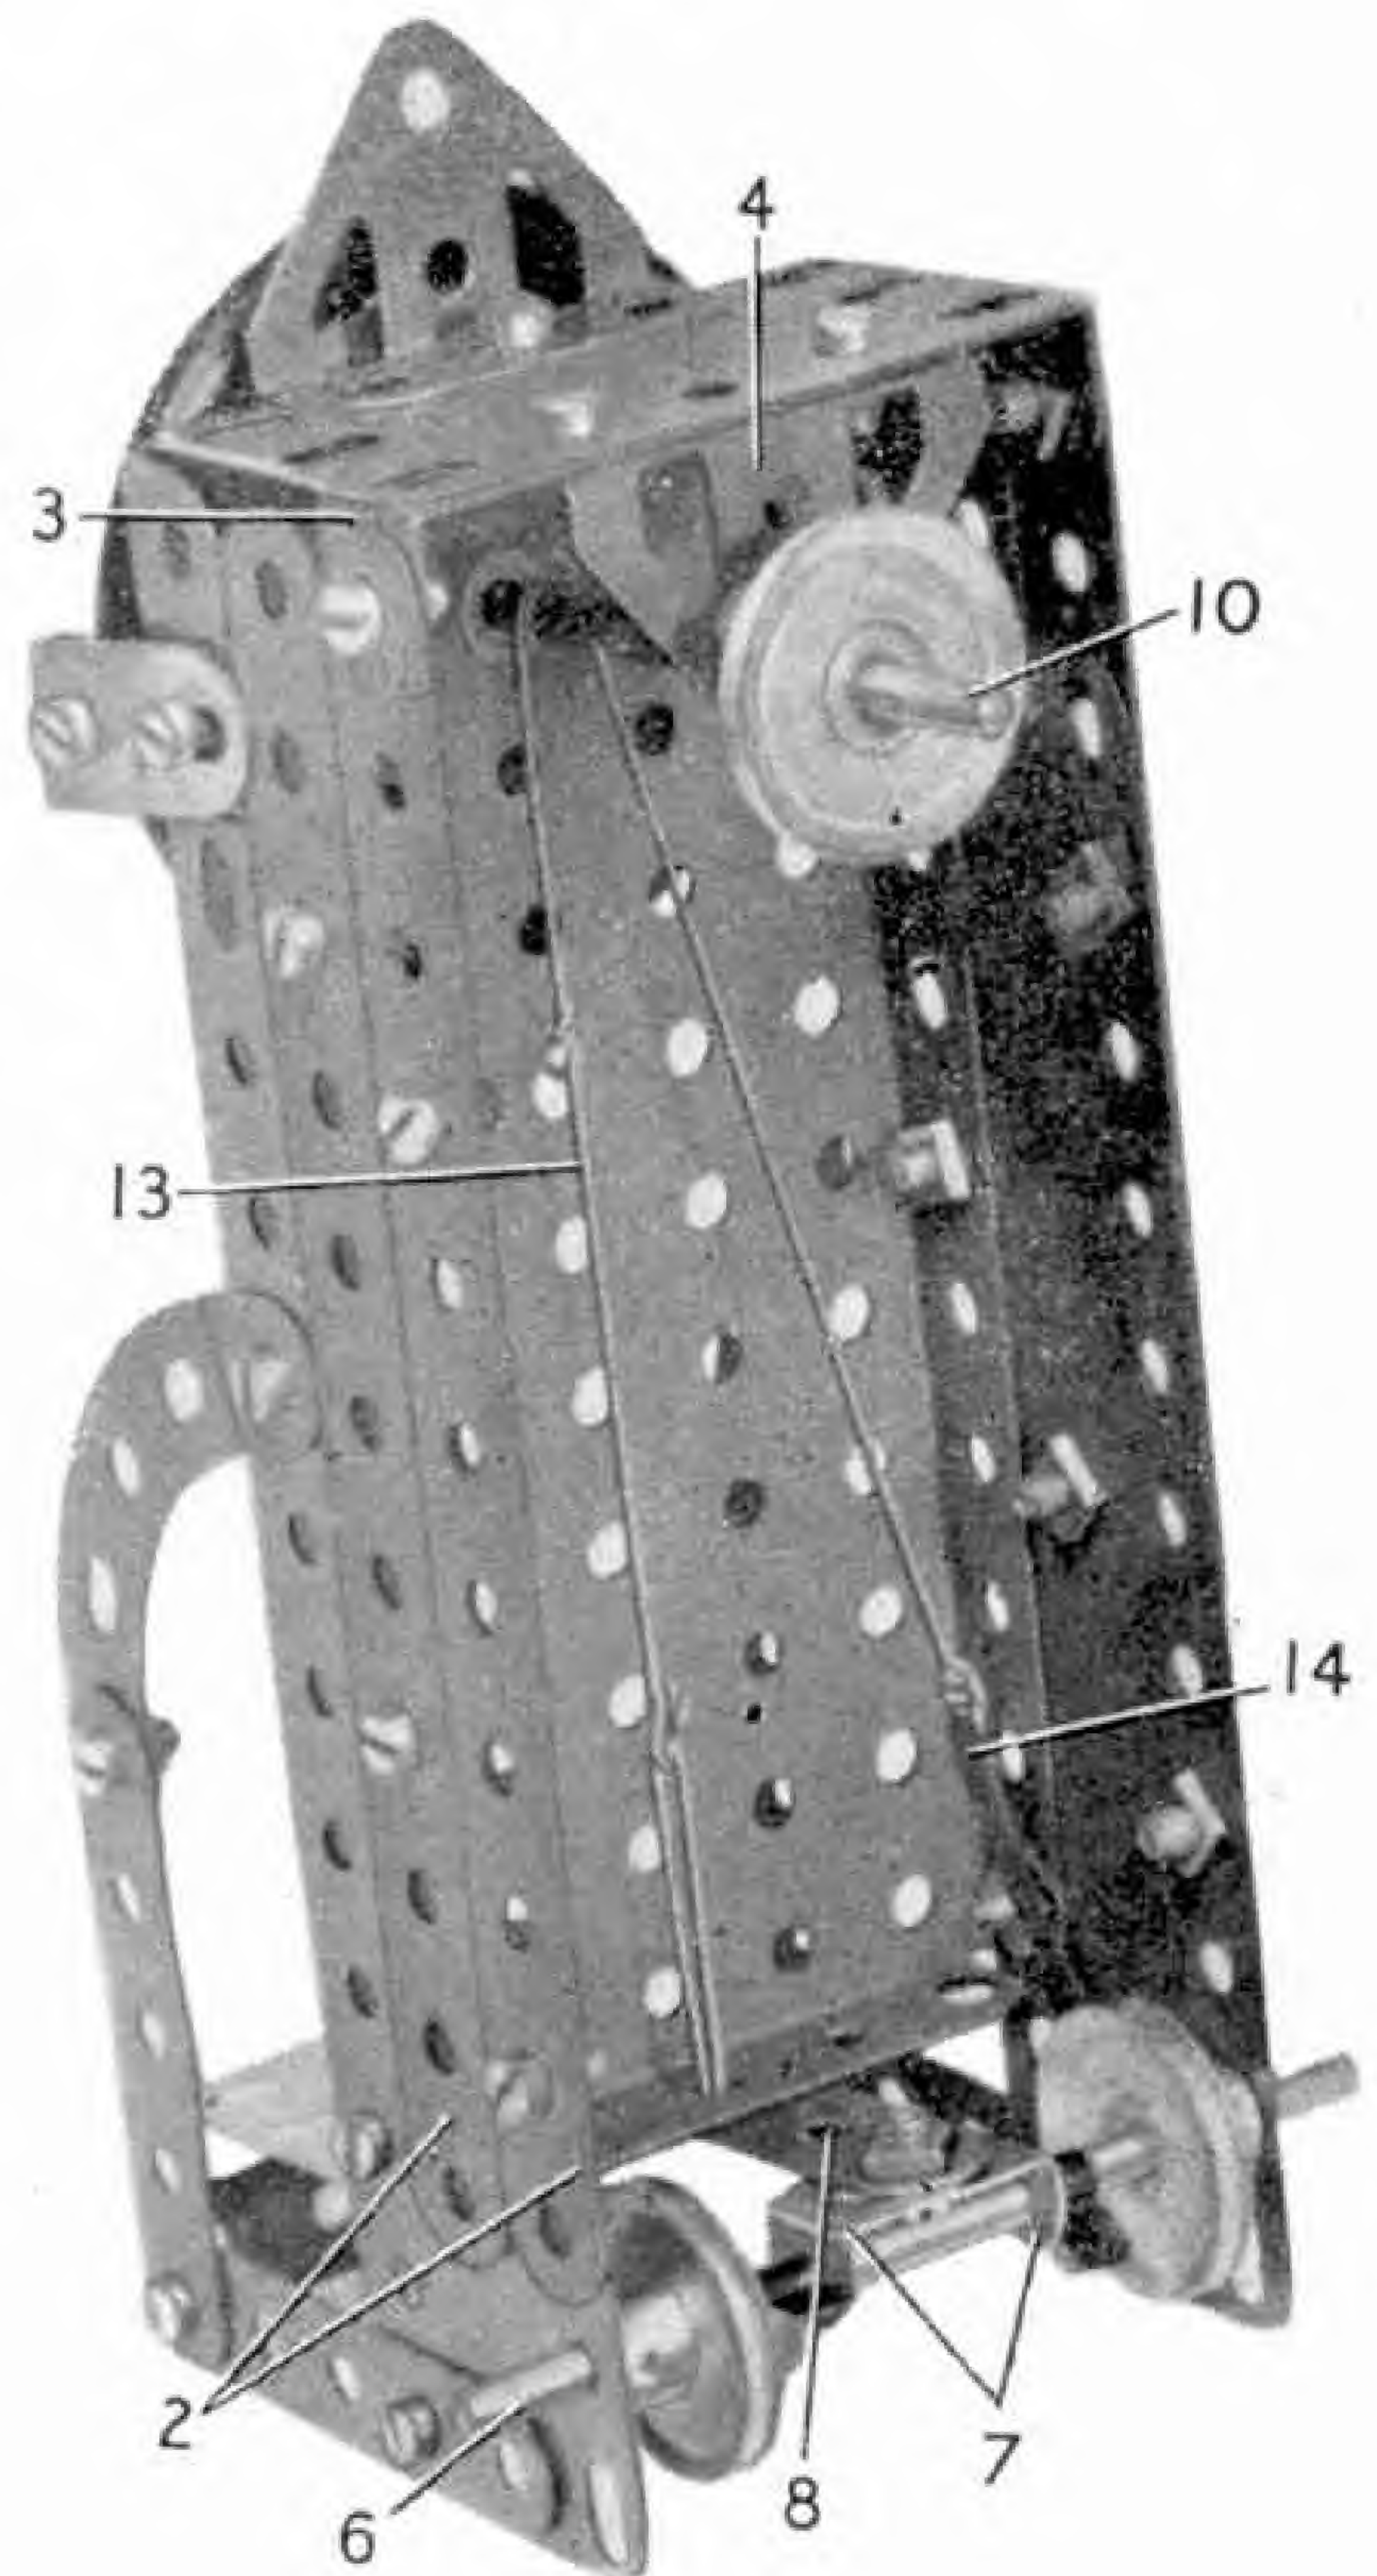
A rear view of the Platform Weighing Machine, showing the mechanism.
